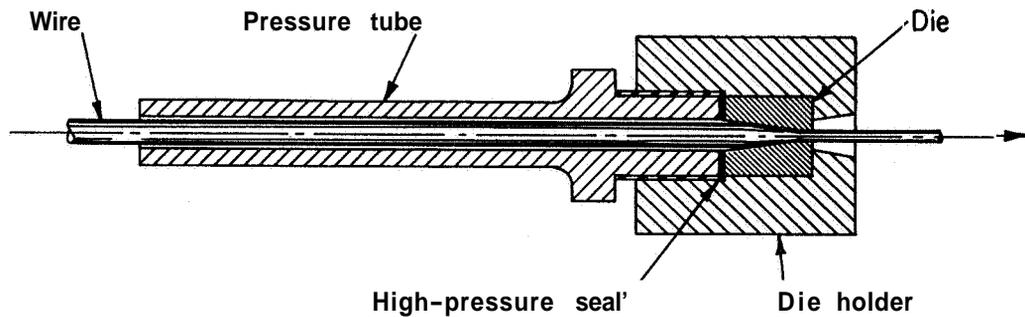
TYPICAL ARRANGEMENT OF INLET TUBE AND DIE FOR HYDRODYNAMIC LUBRICATION (Ref. 60)
